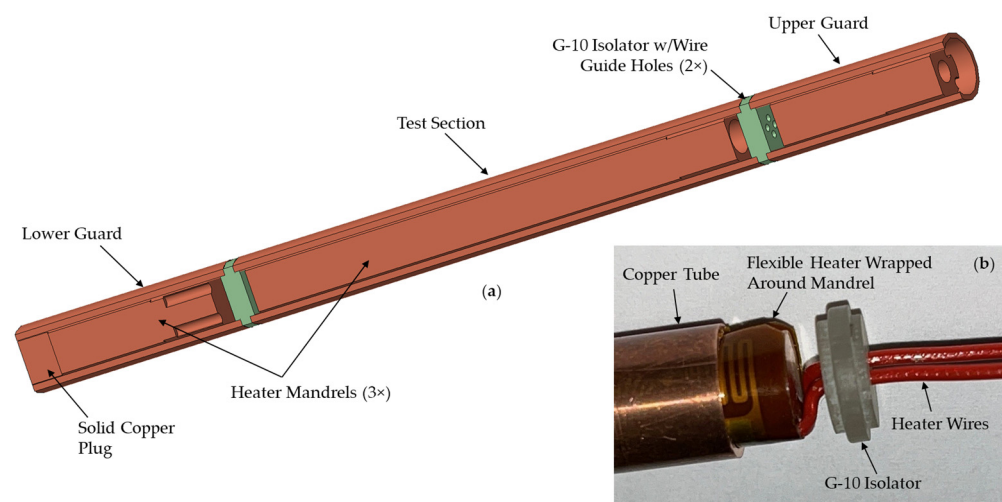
Inner heater assembly version 2: (a) CAD model cut-away showing major components; (b) close-up view of the lower guard parts during assembly.
